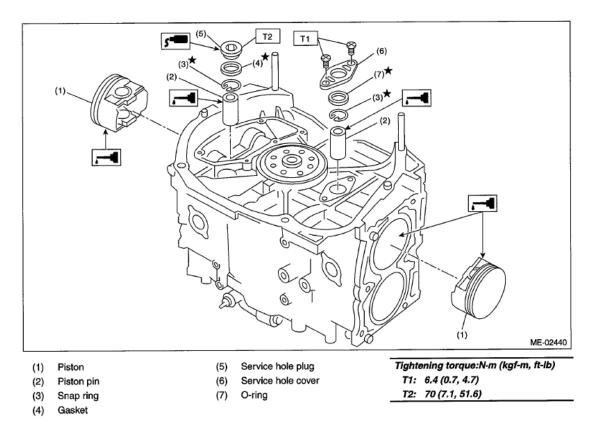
Identifying Cylinder Block Components With Torque Specifications Courtesy of SUBARU OF AMERICA, INC.
